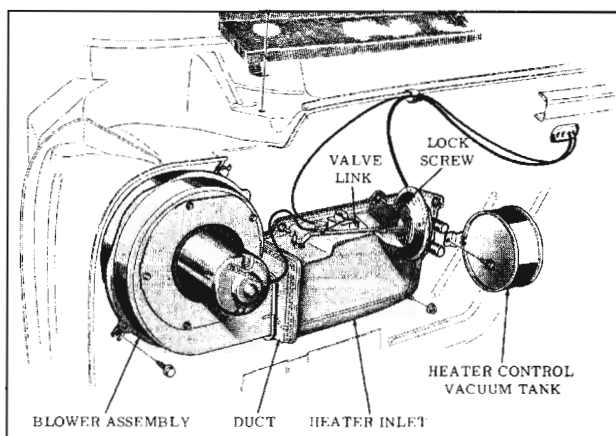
Heater Inlet Diaphragm Adjustment
